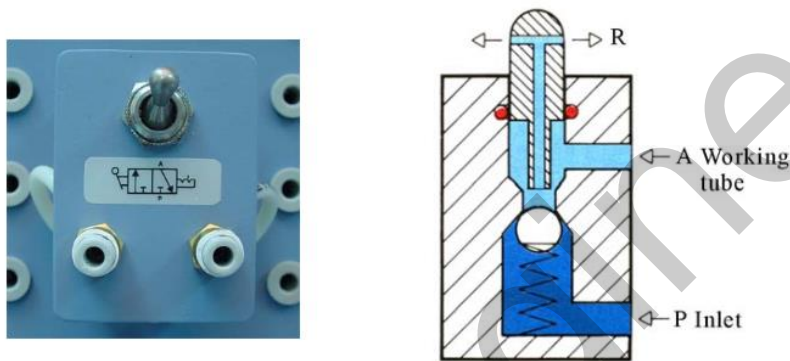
(a) 3/2 directional control valve (b) Cross section
